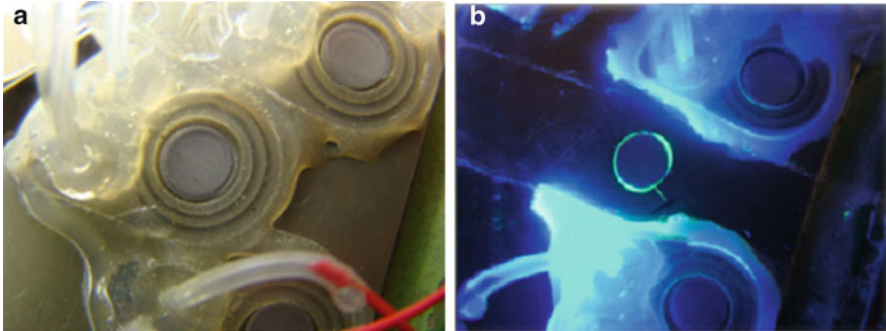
Crack detected by a CVM™ sensor in a metallic barrel test. (a) CVM™ sensors installed around rivets; (b) one of the sensors was removed and dye penetrant testing confirmed the presence of a crack
